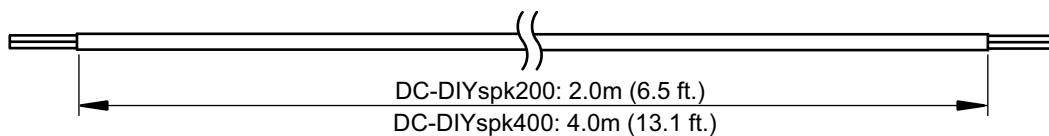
Outline drawing and dimensions for DC-DIYspk200 / DC-DIYspk400 speaker wires.
